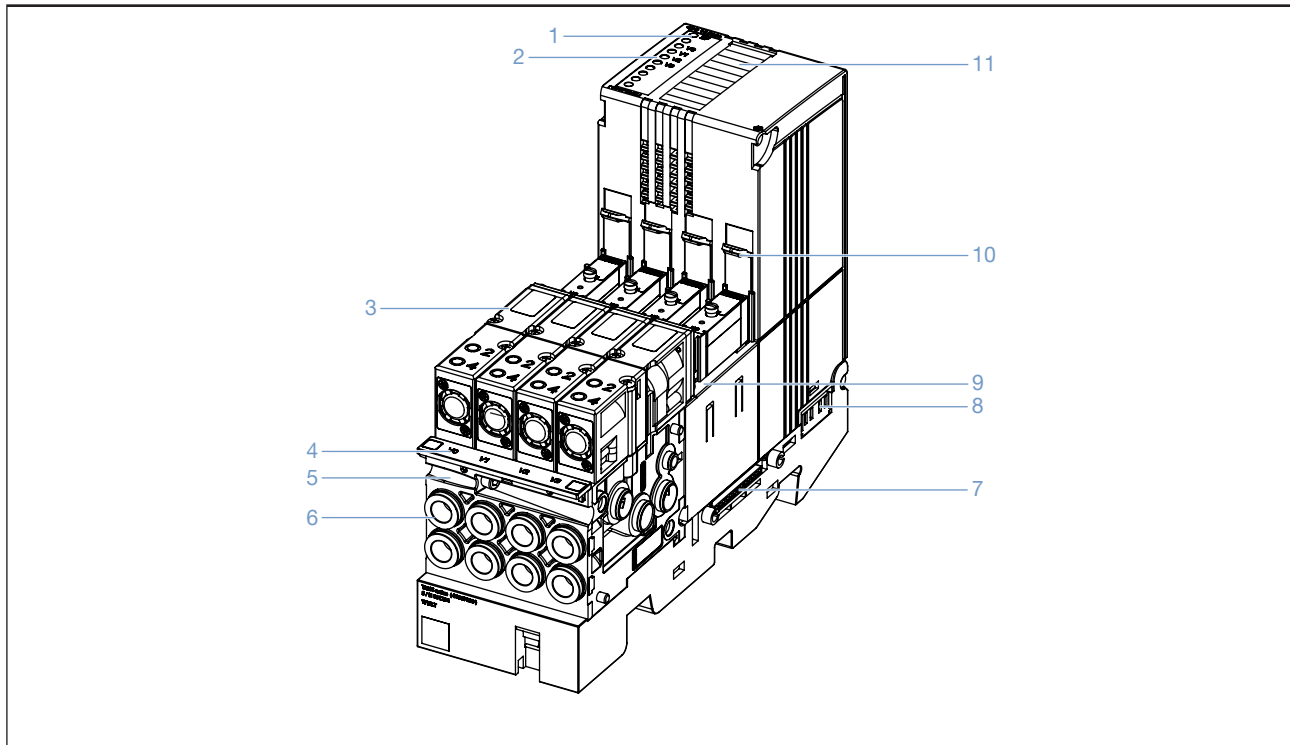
Overview valve segment (example: width per valve 66 mm)
